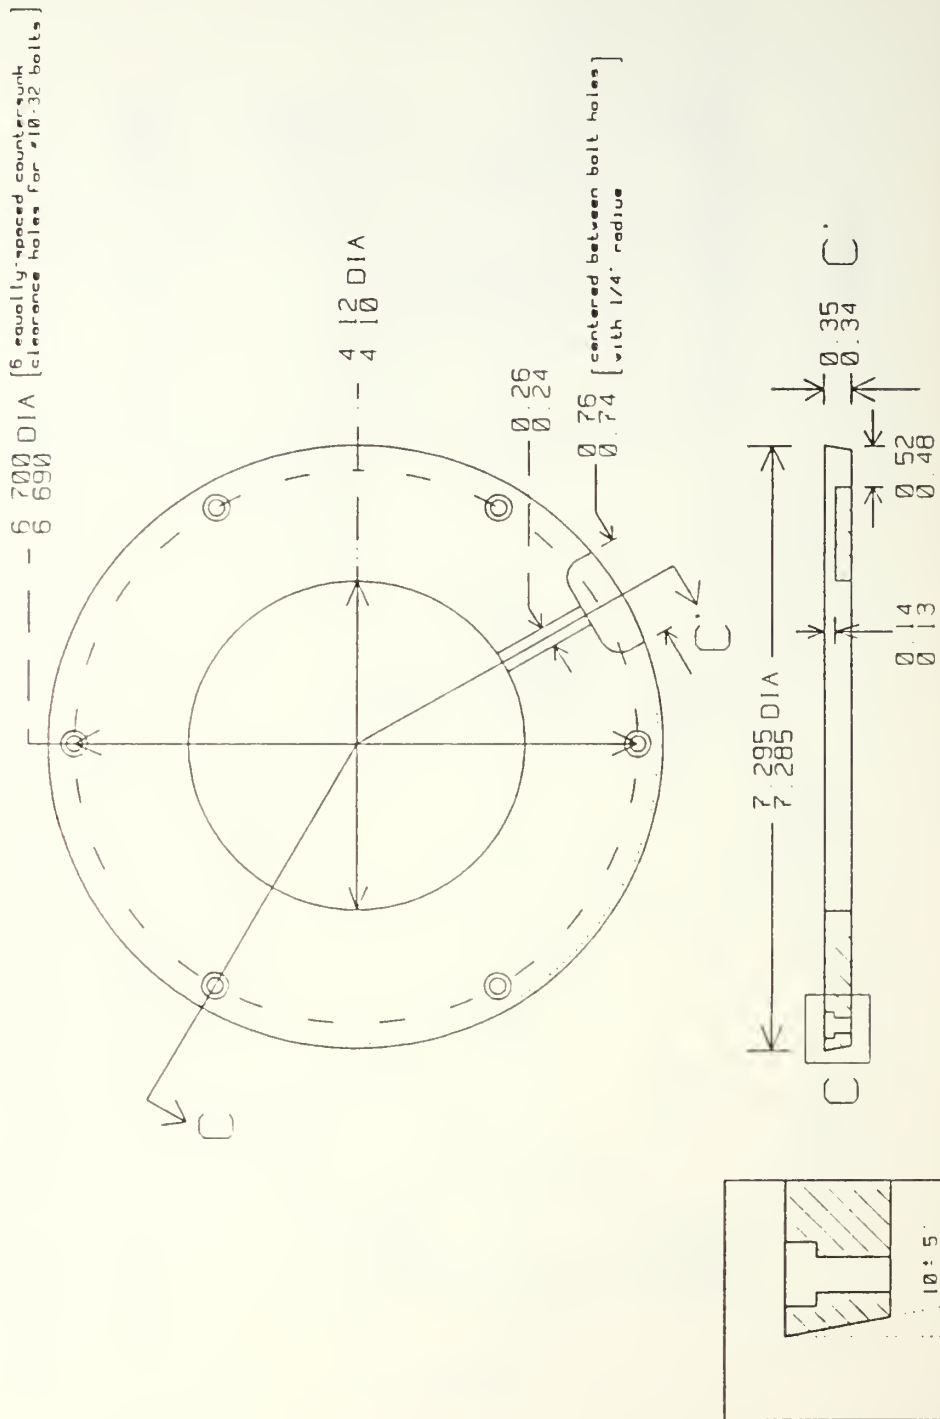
Plane and Section Views of the Pusher Plate with Taper Detail
